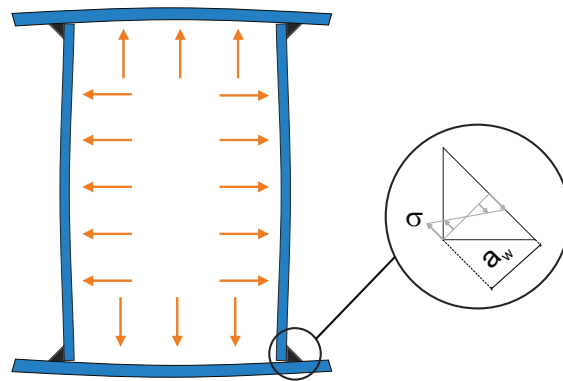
Internal pressure leading to bending on single-sided fillet welds
